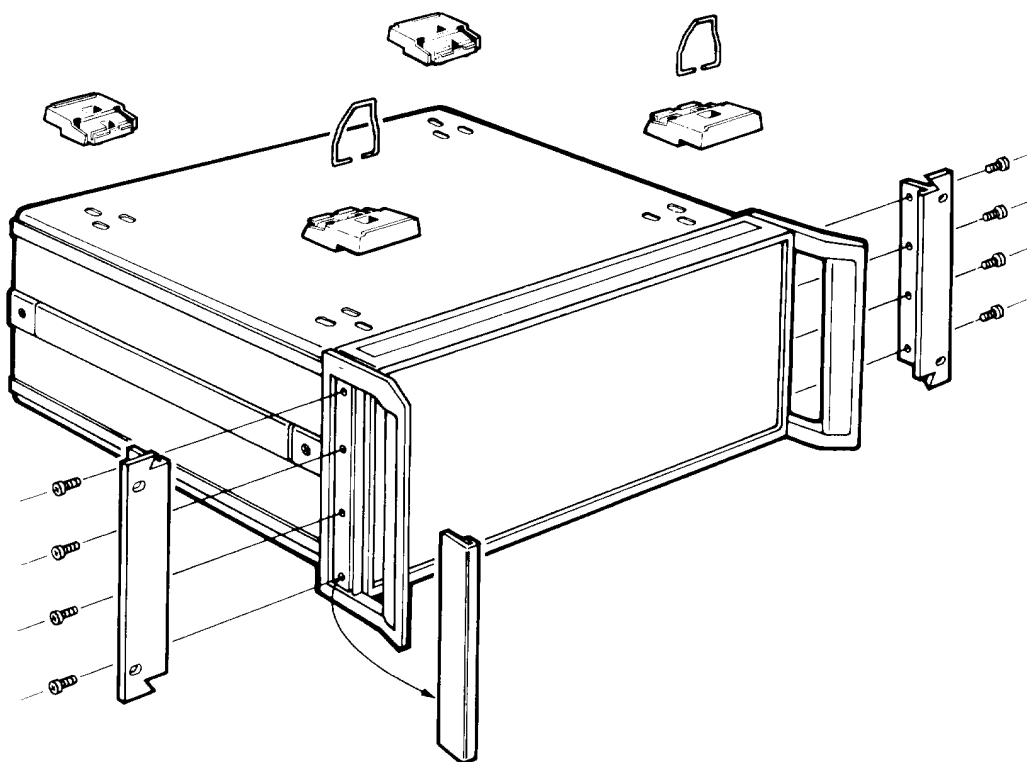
Rack Flange Kit Mounting Instructions (Option 908)
